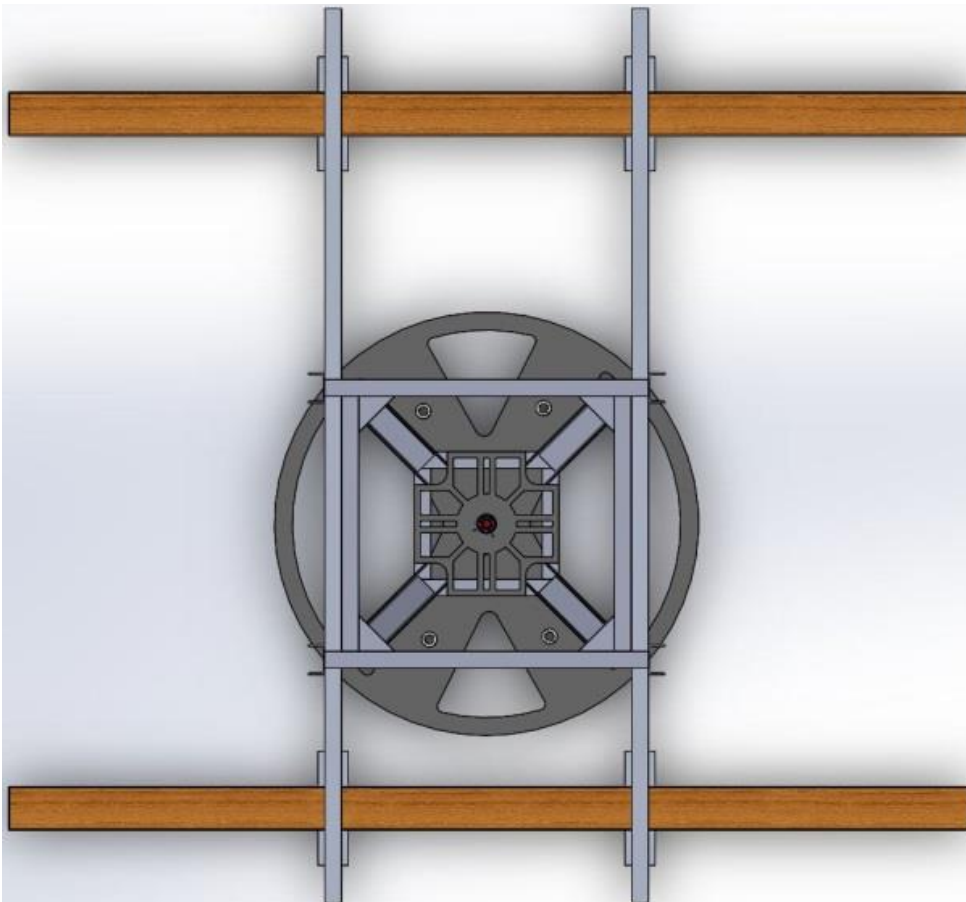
D CAD model of the Suspension and Rotation Framework Assembly(Top View)
